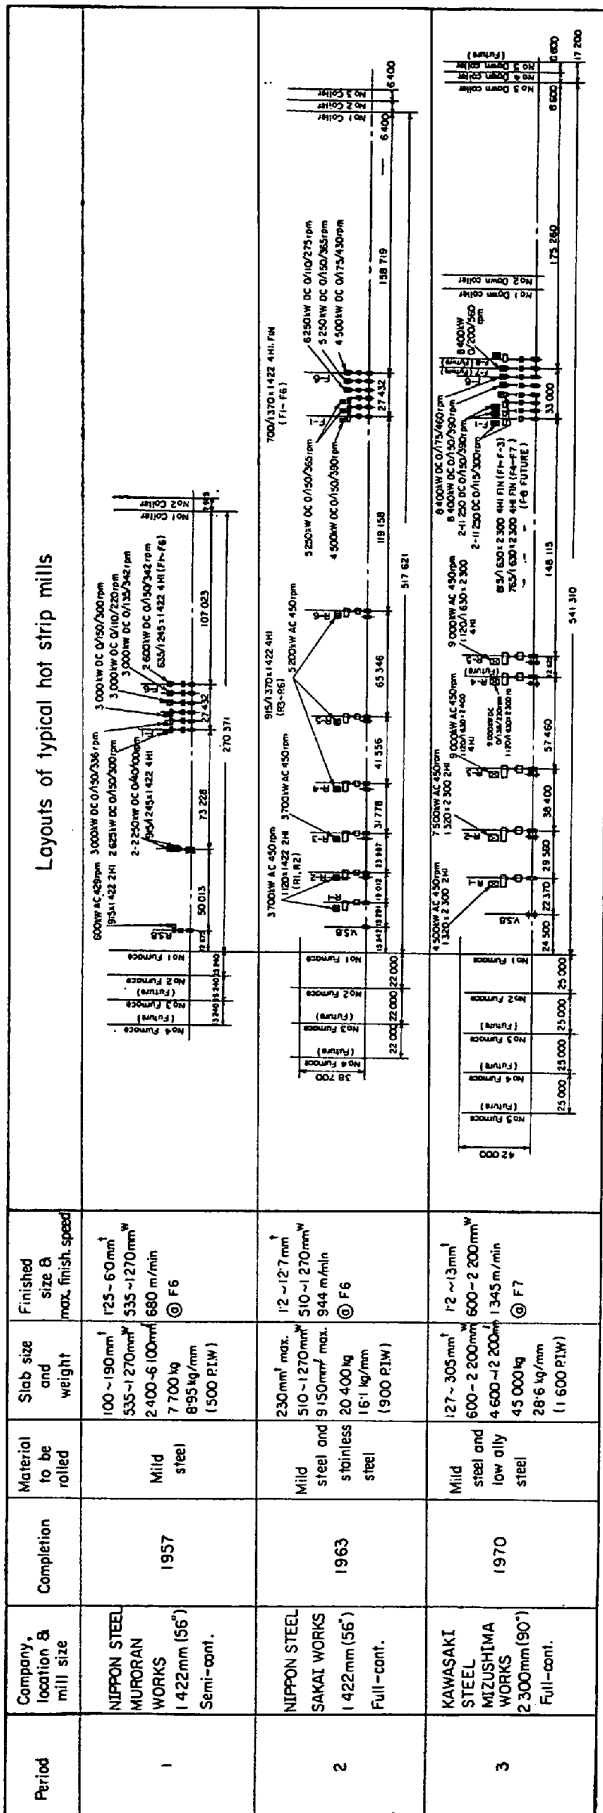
Layouts of typical hot strip mill installed in period 1, 2 and 3.
